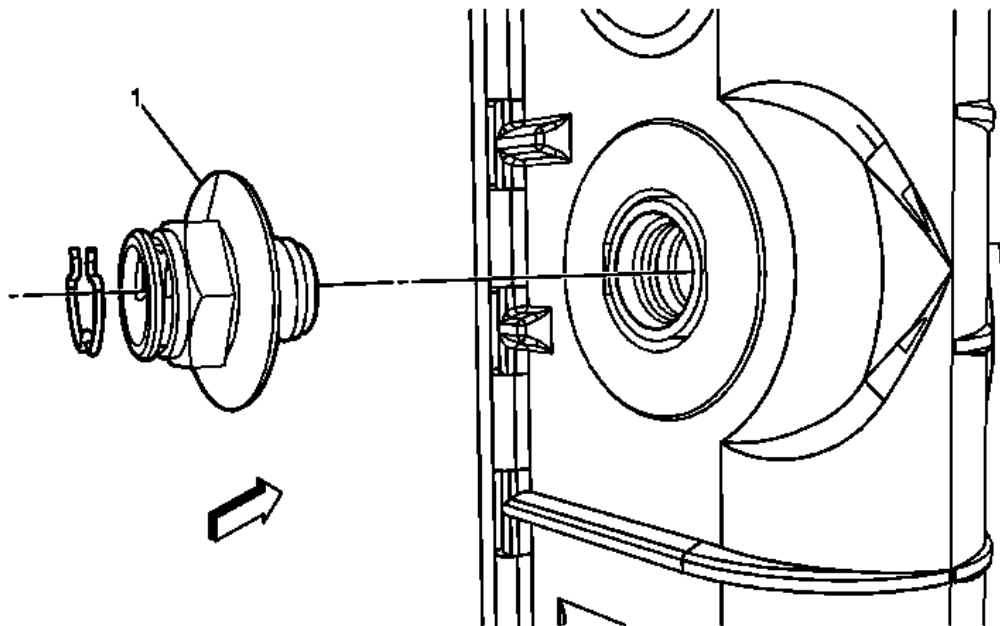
View Of Transmission Fluid Cooler Hose/Pipe Connector
